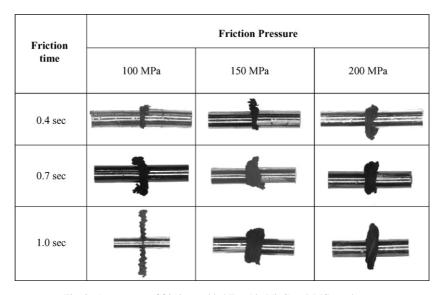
Appearance of friction welded Zr₅₅Al₁₀Ni₅Cu₃₀ BMG specimens.
